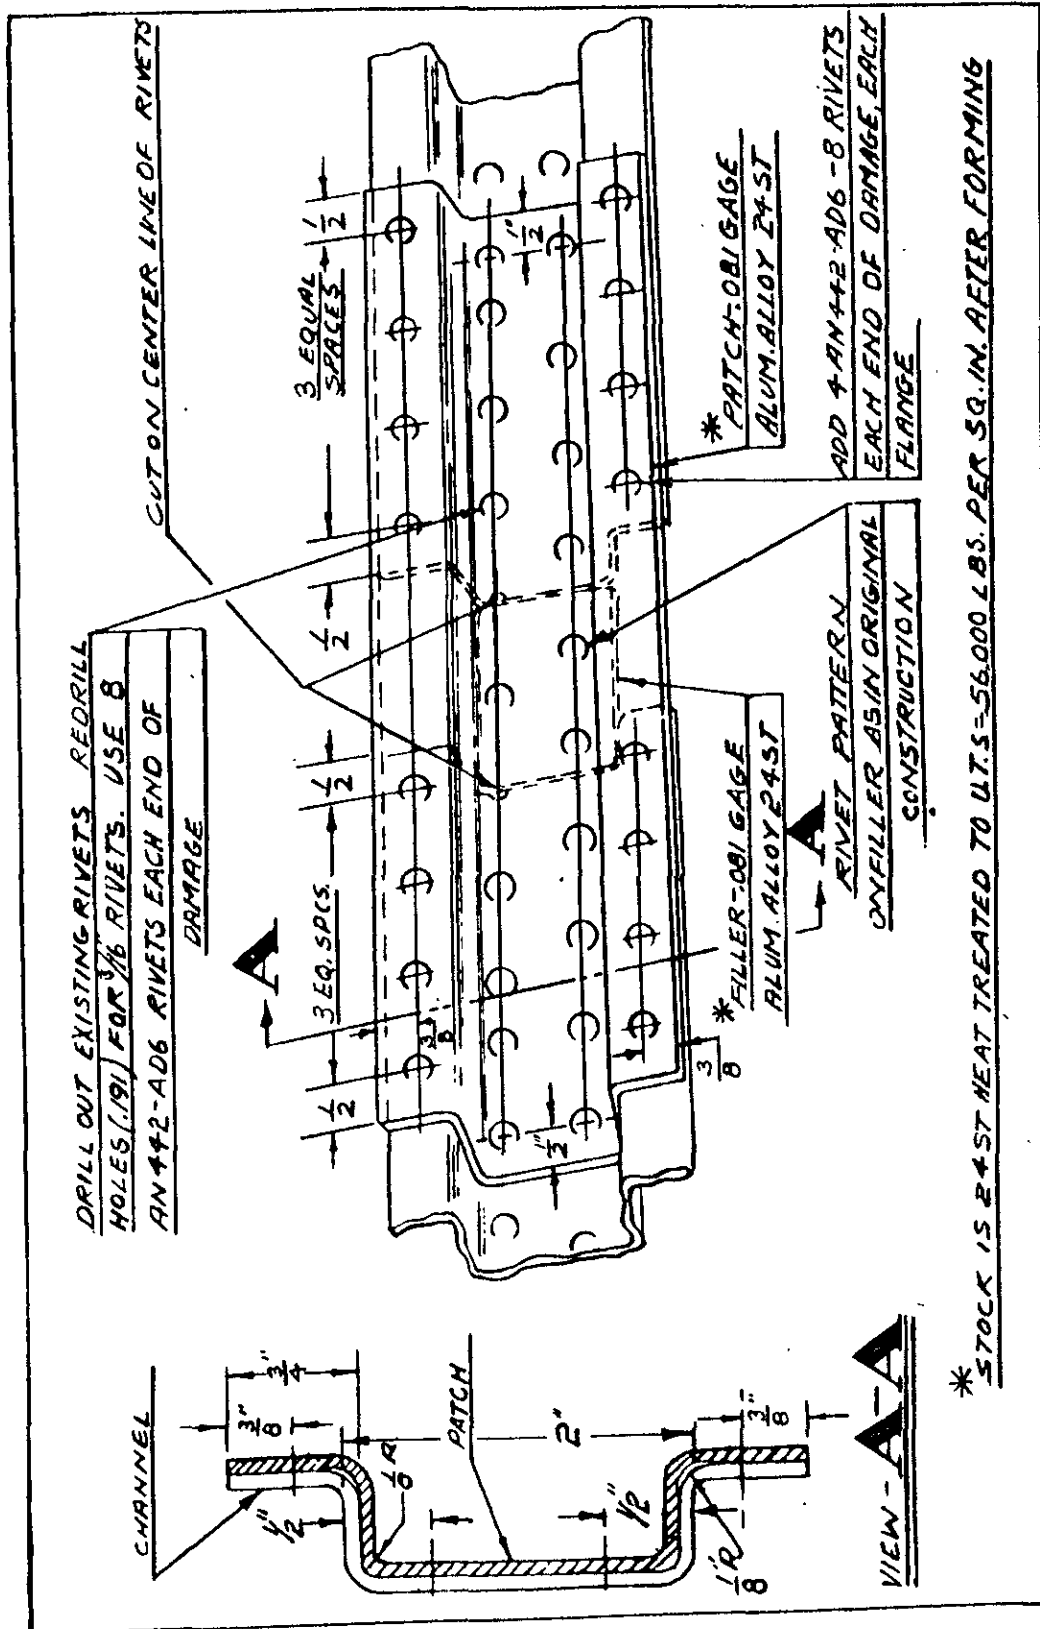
Fire Wall - Upper Cross Channel Patch P-40D, E, E-1
